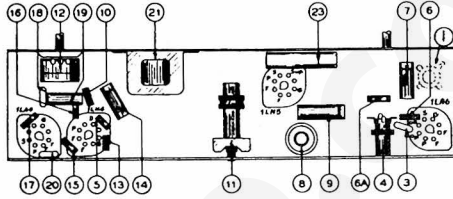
LOCATIONS OF PARTS — UNDERSIDE OF CHASSIS — MODEL 42-121.
